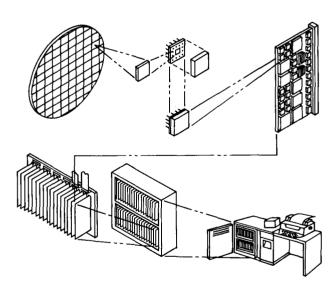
Conventional integrated circuit packaging: wafer to machine. Consists of dicing the integrated circuit chips from the silicon wafer, bonding the chip to a substrate, soldering the module into a card, plugging several cards into a board, cabling the boards into a gate, and attaching the gates to a machine.
